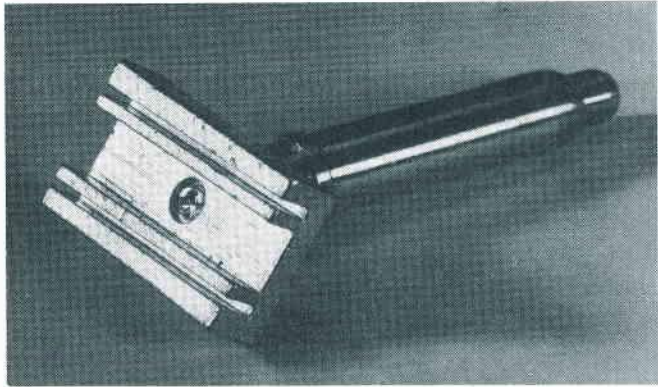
A desoldering tip for removing chips that are soldered to the circuit board.
